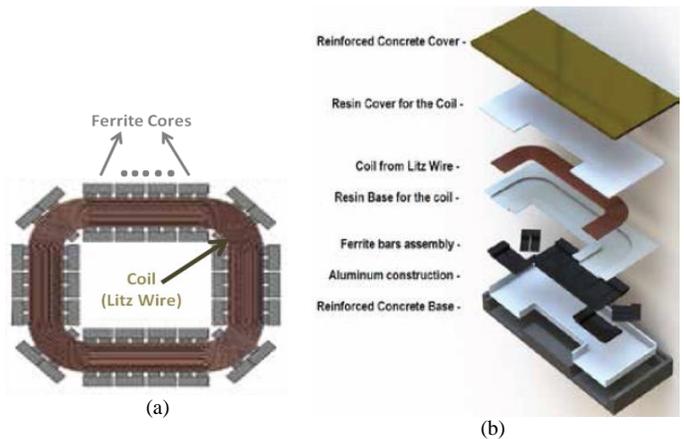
(a) Design presented in the FastInCharge project, (b) 3D section view of the primary coil [14]
